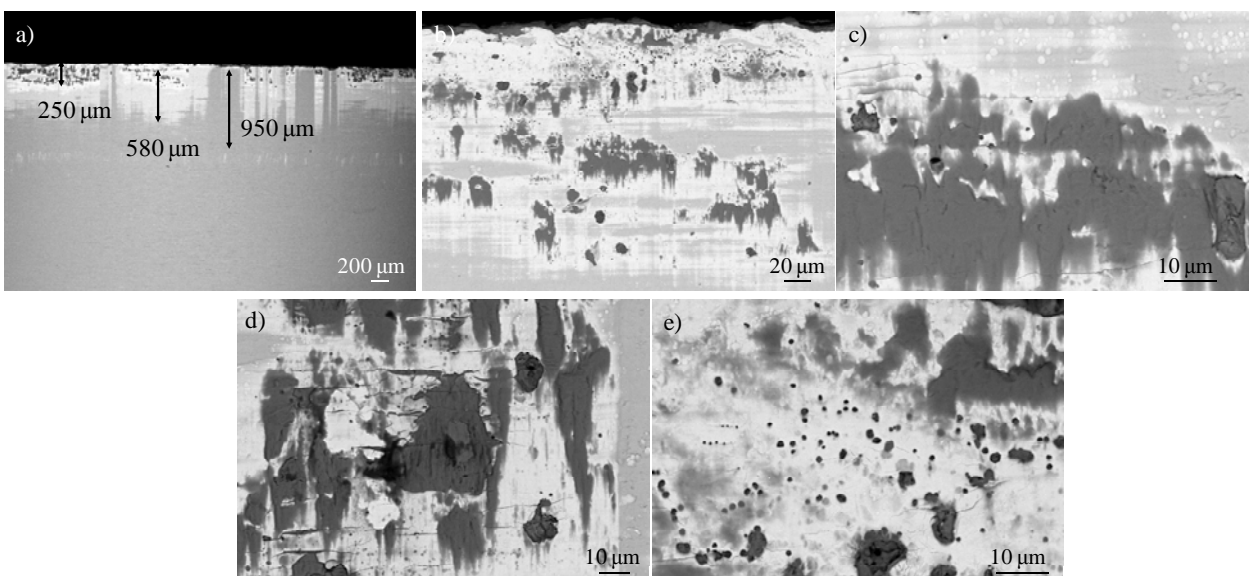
Fractography of the UNIVERSAL punch coated with W:C-H; flank face at 1500 strokes
